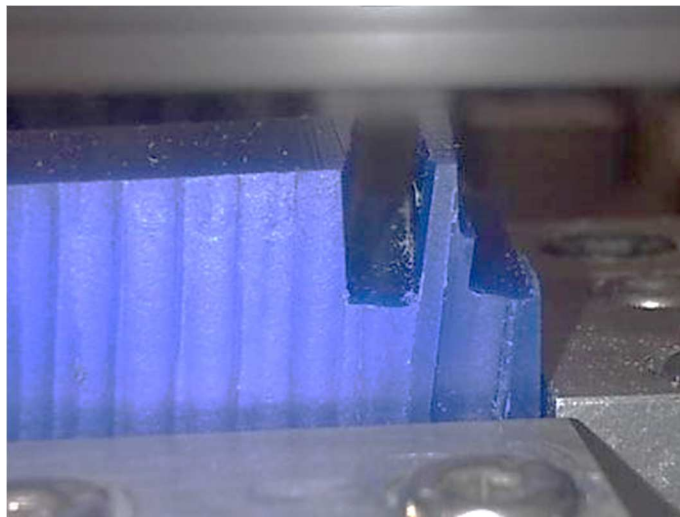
A tapered wall machined from the most tilted angle of the tool
